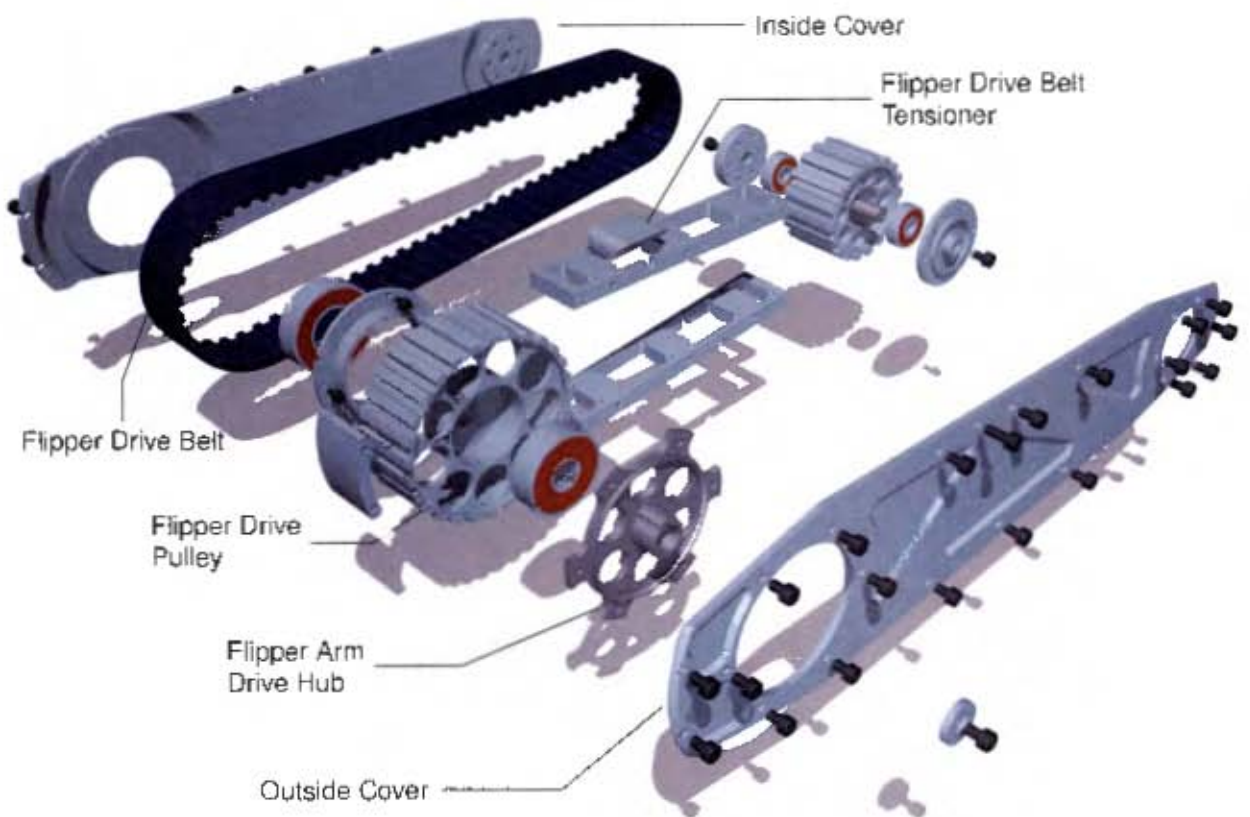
An exploded view showing the various pieces making up the flipper arm.
